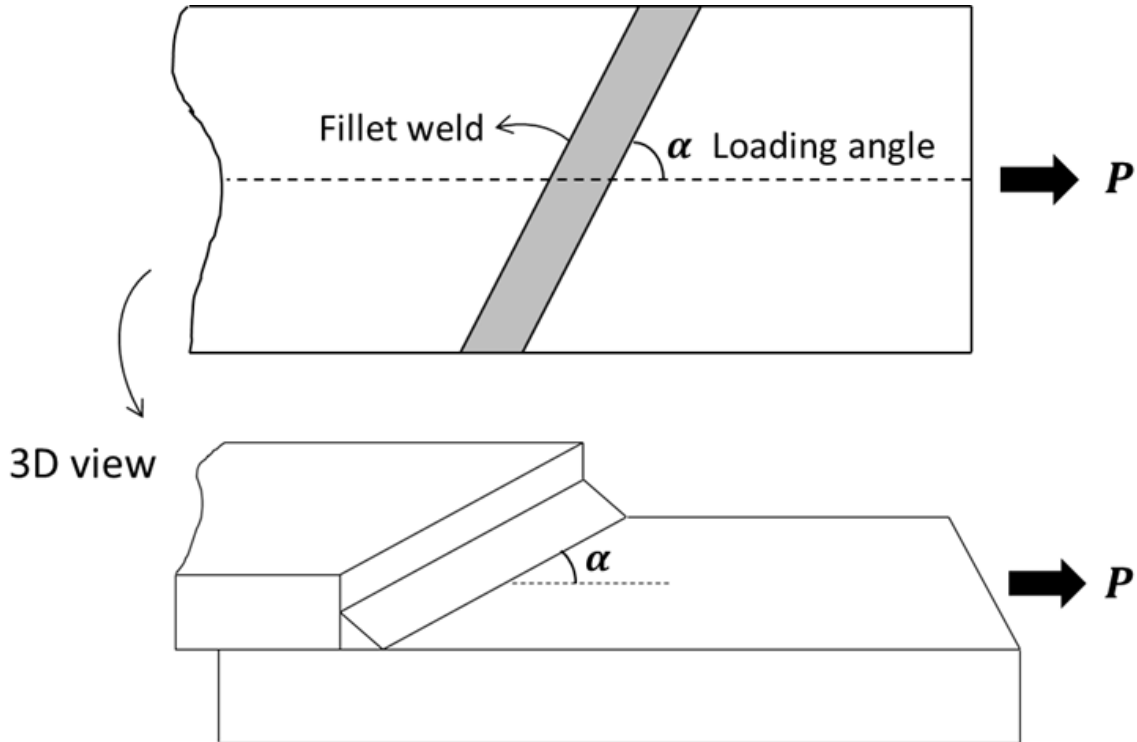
Fillet weld under remote load  $P$  with loading angle  $\alpha$
